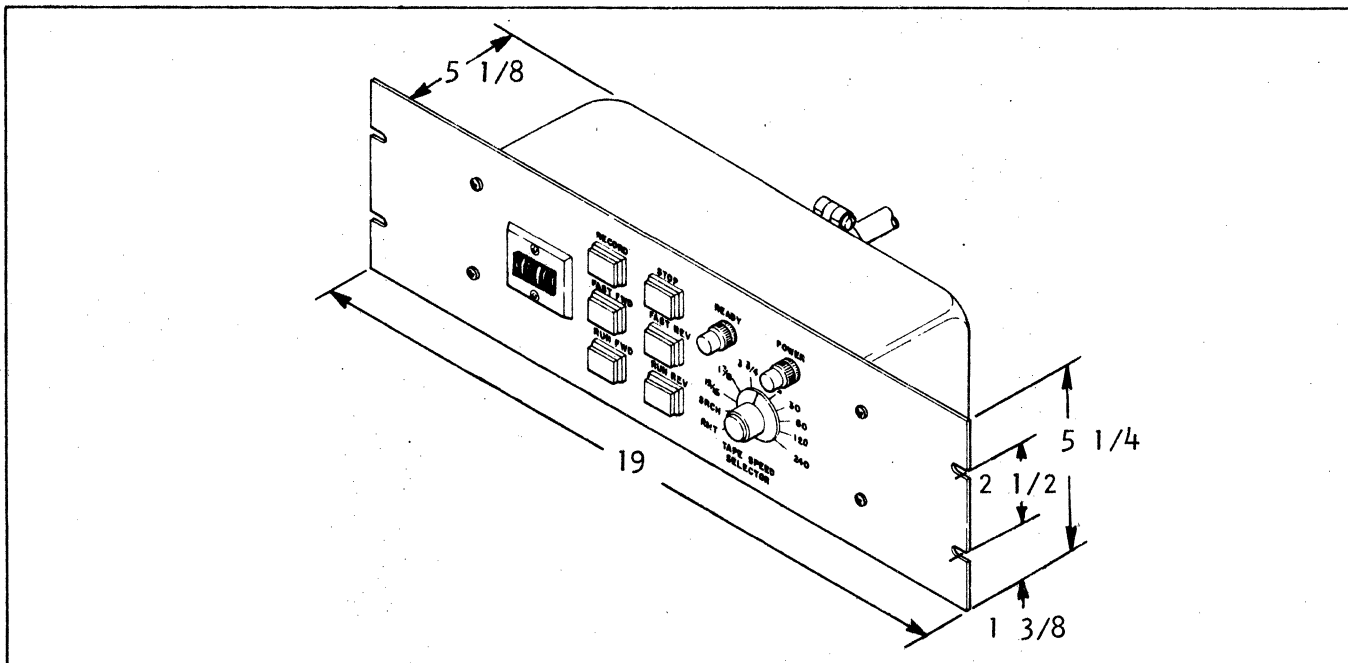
Mounting Dimensions, 13-587 Remote Control Assembly 2-1/2-2
